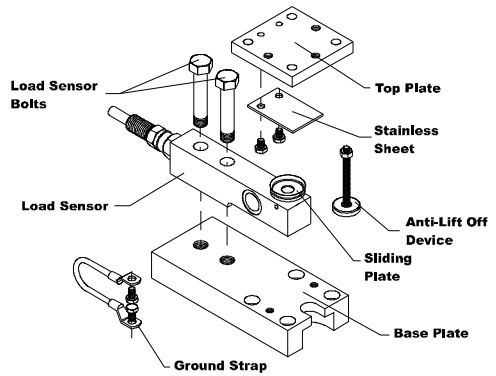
EXPLODED ISO VIEW OF FREE SLIDING LOAD POINT ASSEMBLY
